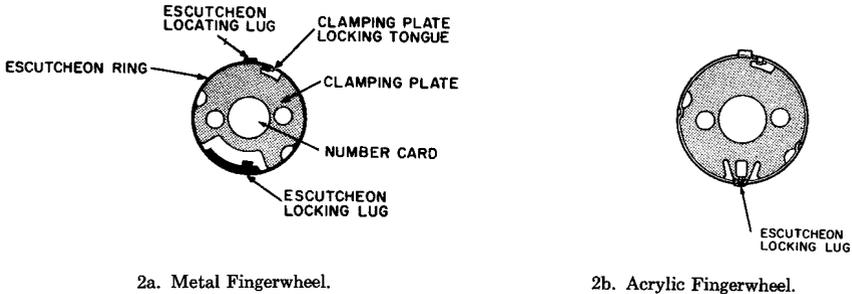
Escutcheon Disassembly, A.E. Co. Fingerwheels.
